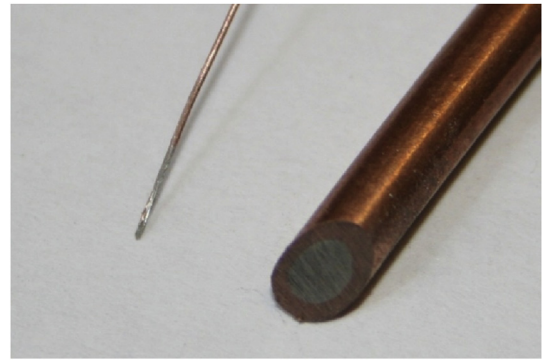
Views of the Cu/1 Mg-composite makes: on the right-hand side – the rod of 3 mm in diameter after hydroextrusion; on the left-hand side – the wire of 0.25 mm in diameter, which was made from the rod by drawing.
